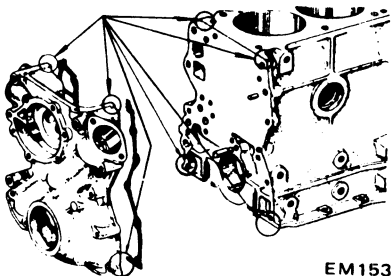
Applying Sealant (Front cover and cylinder block)
